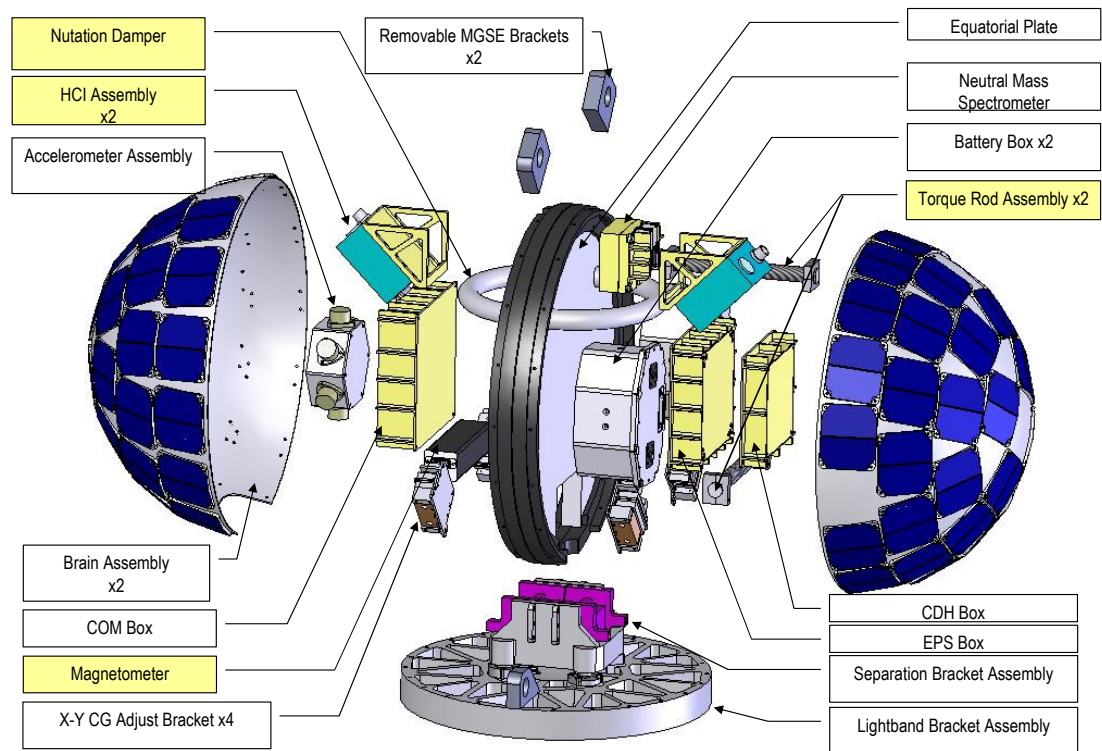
An exploded view of the DANDE spacecraft assembly. Attitude subsystem components are highlighted.
